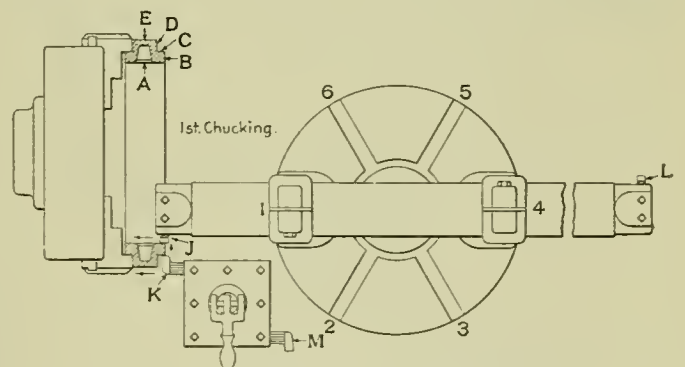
Tooling of Universal Turret Lathe for First Operation In Machining Piston Valve Bull Ring
